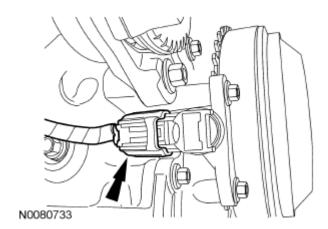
Locating Crankshaft Position Sensor Electrical Connector Courtesy of FORD MOTOR CO.
